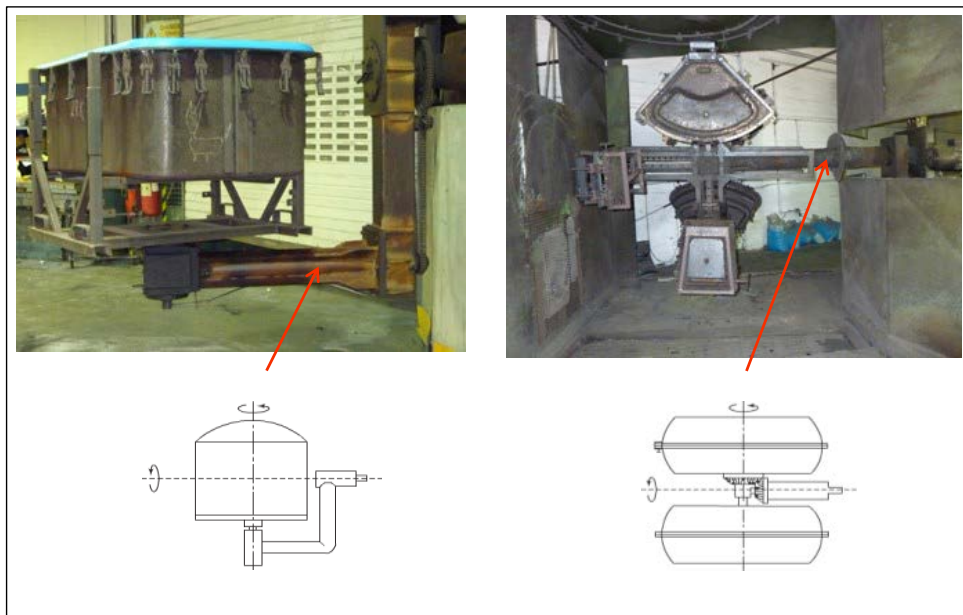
Rotational moulding machines with (a) drop arm and (b) straight arm
